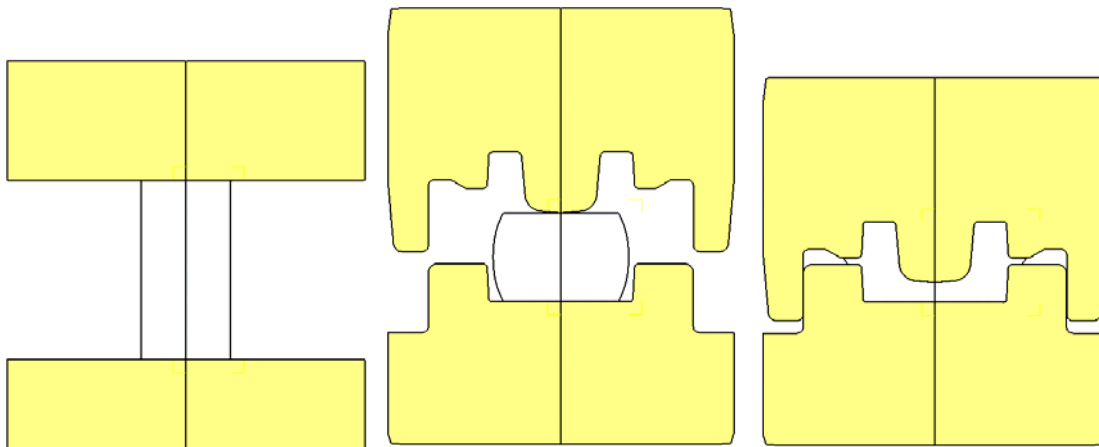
stage gear blank forging sequence (Courtesy: Sypris Technologies)
